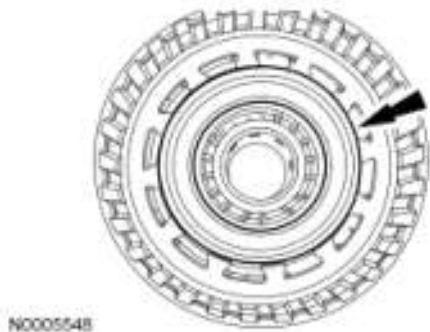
Locating Intermediate Clutch Return Spring Top Plate
